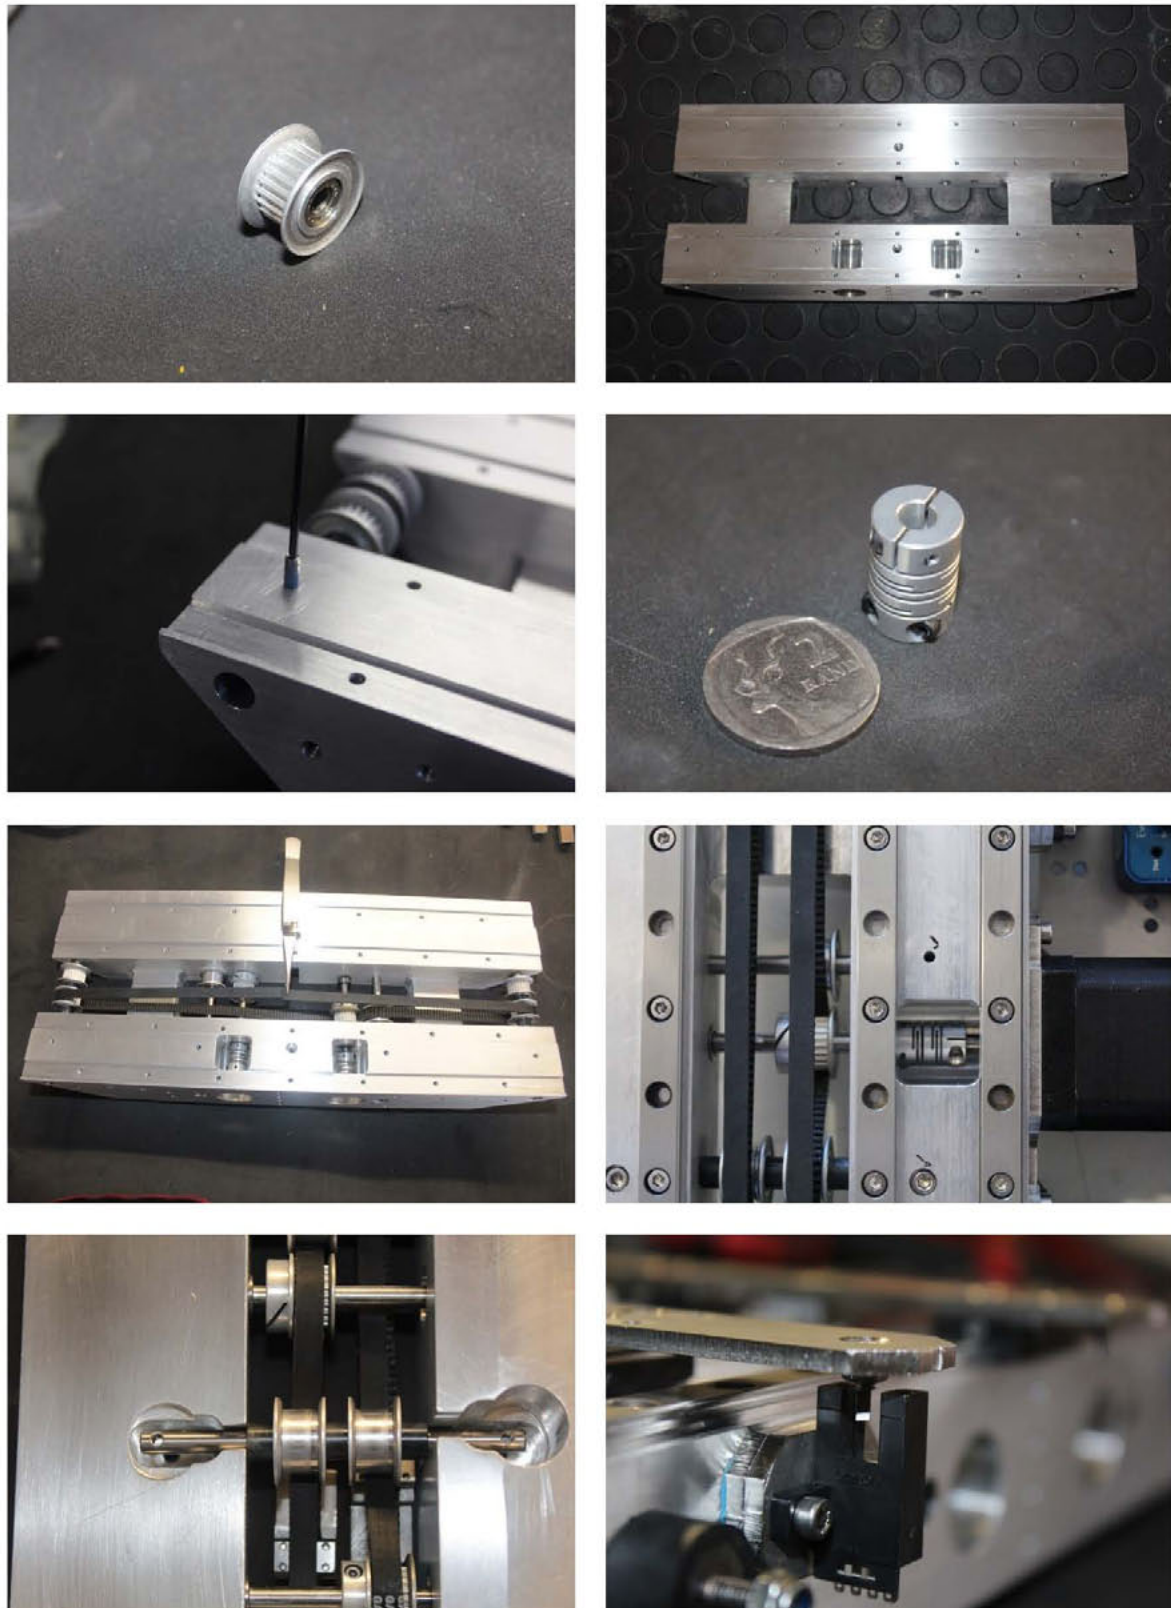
Selected Pictures of the Rail Carriage Assembly. From top left to bottom right: a toothed idler; the gantry; the assembly of an idler shaft, a flexible couple, the drive belt pathway, the assembly of a drive shaft, installation of the tensioning shaft; the light gate and trigger-screw.
